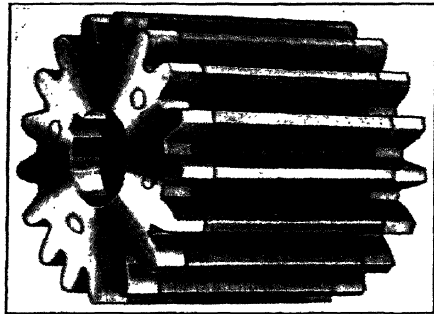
Brass flanged rawhide pinion. The effective width of the gear does not include the metal flanges.
